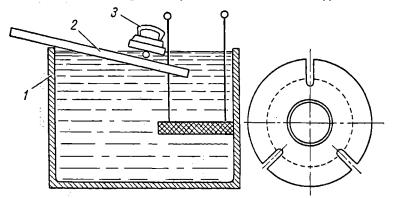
Schematic view of "fron" hardening: 1 - bath; 2 - plate 3 - iron
